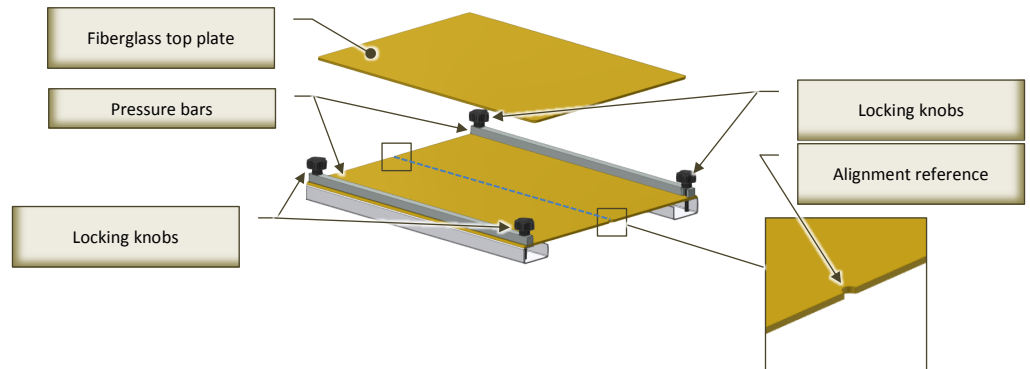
Positioning of a fabric belt on the equalizing plate (parts)
